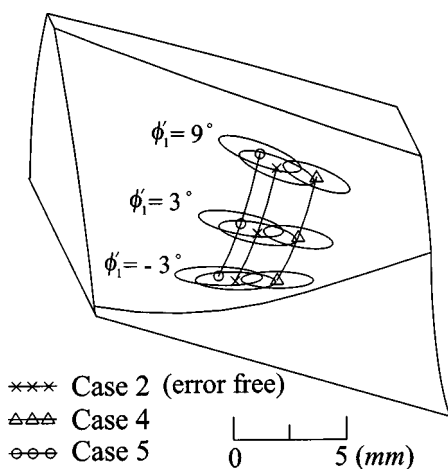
Bearing contacts of the straight concave beveloid pair with assembly errors.
